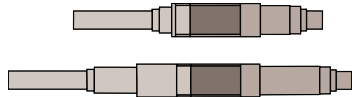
Rotor structure for tooth-coil winding machine (top) and 50% longer middle part for a full pitch distributed winding machine (bottom).
